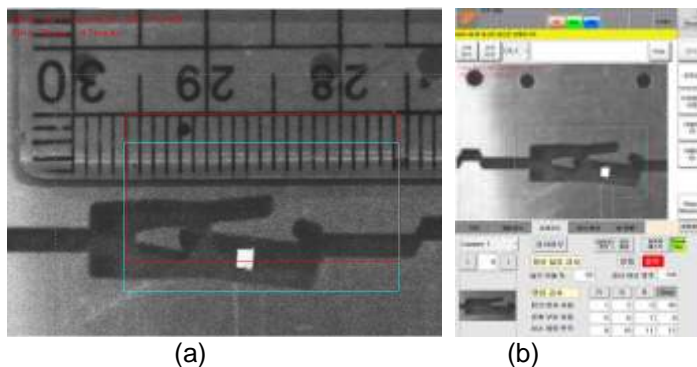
Minimum Size of Defect Can Be Measured by Mold Inspection Module: (a) Defect Size, (b) Measured Defect
